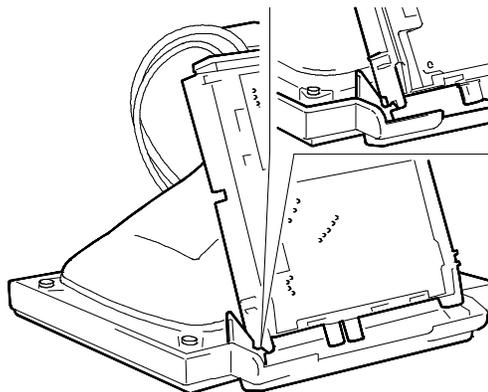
Mechanical detail of motherboard support latching to video frame
